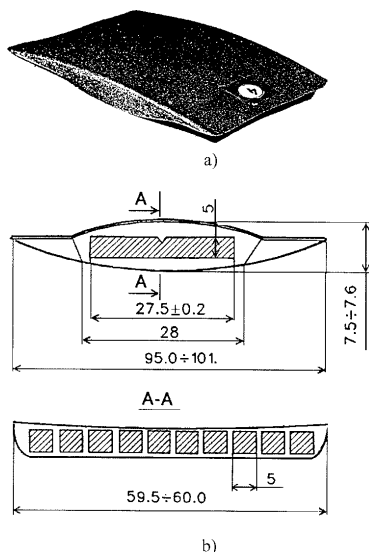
Weld No. 4 template (a) and scheme (b) of mini-Charpy specimens cut out (dimensions in millimeters).
